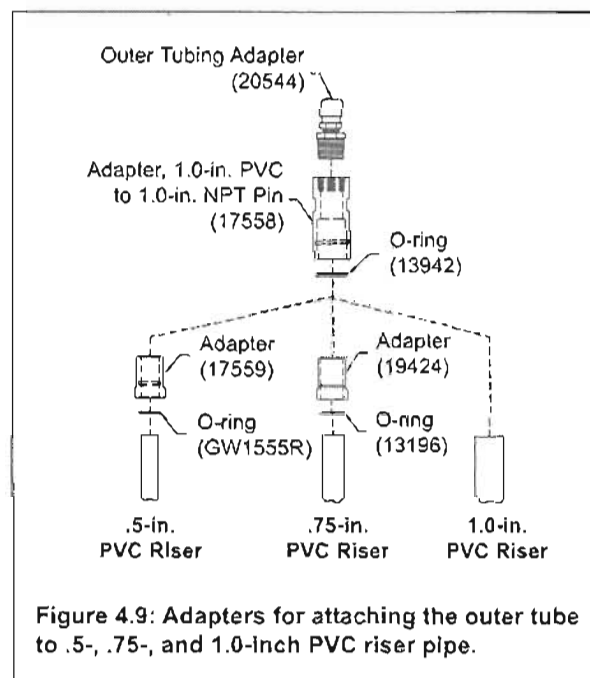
Adapters for attaching the outer tube to .5-, .75-, and 1.0-inch PVC riser pipe.
